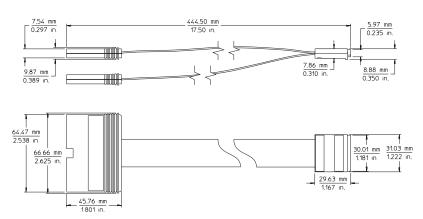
E5385A Samtec 100-pin probe mechanical dimensions
